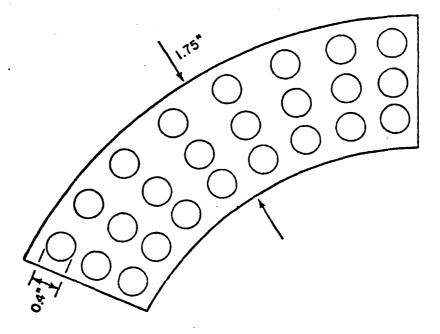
Incoloy 901 Shaft Forging Segment Indicating Cut-Out Pattern for LCF Test Specimens
